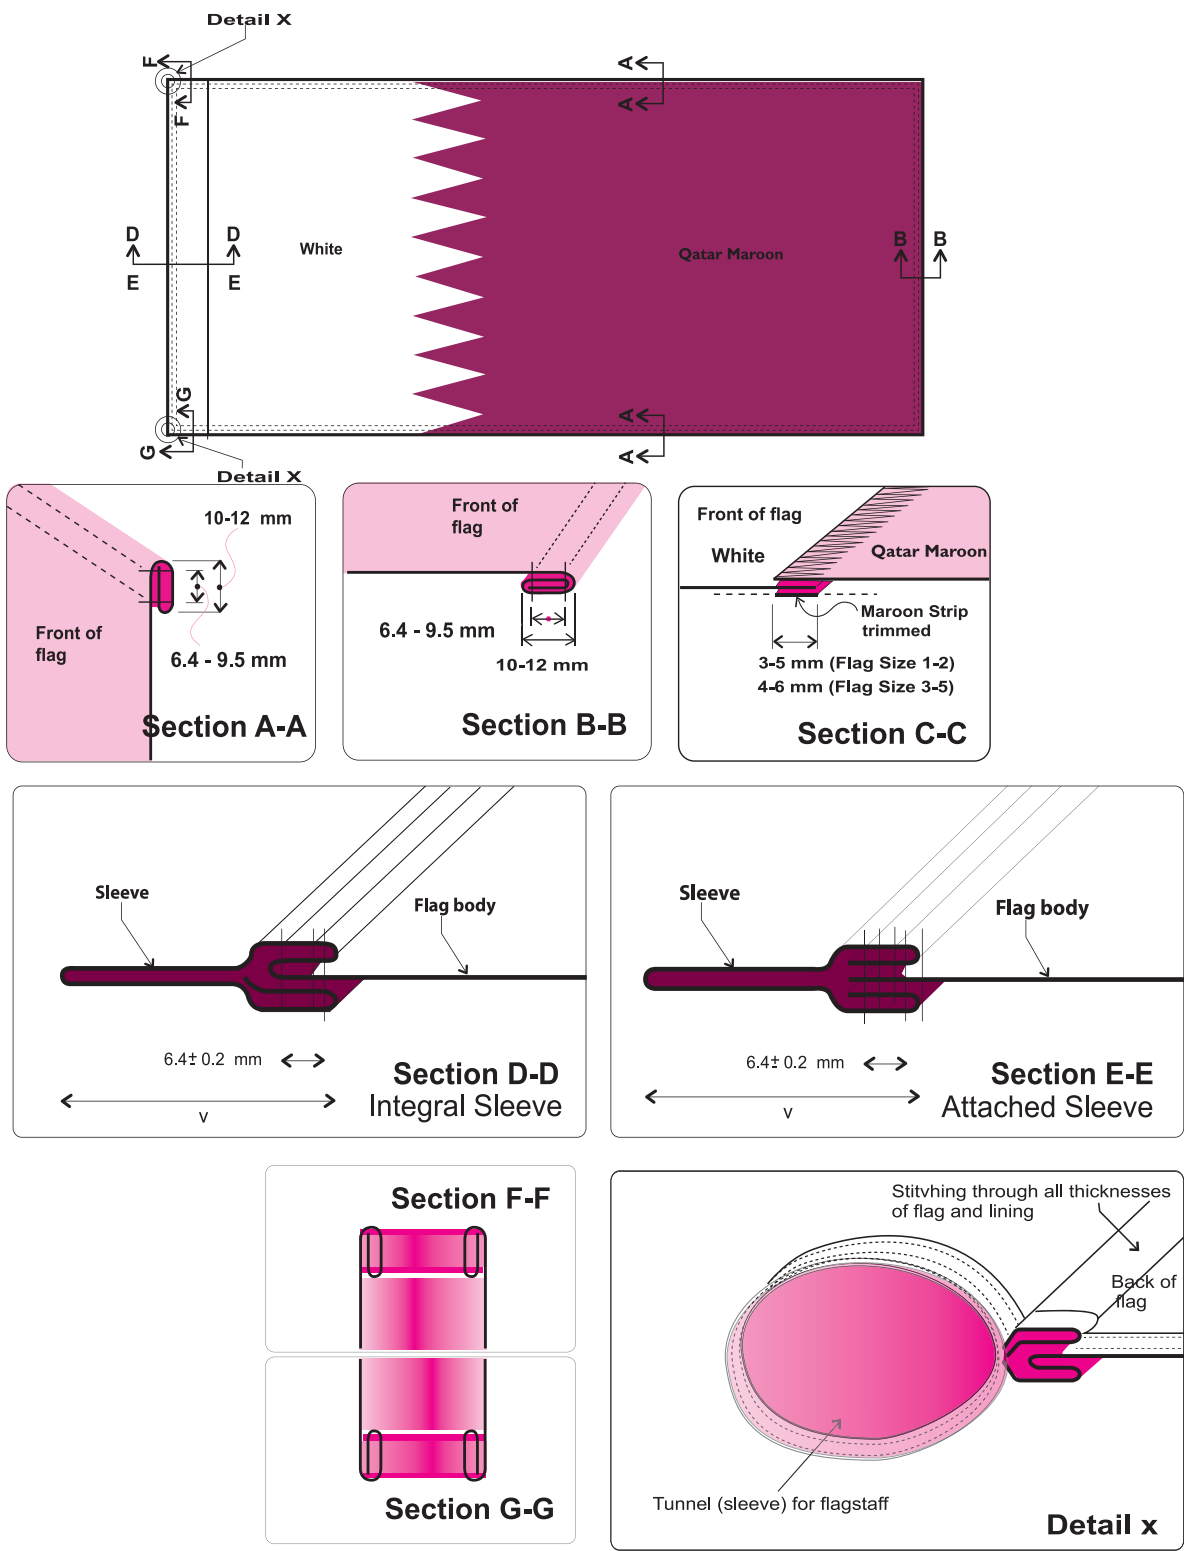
Indoor Flag - One-piece Double Layered Printed Flag - Construction Details
